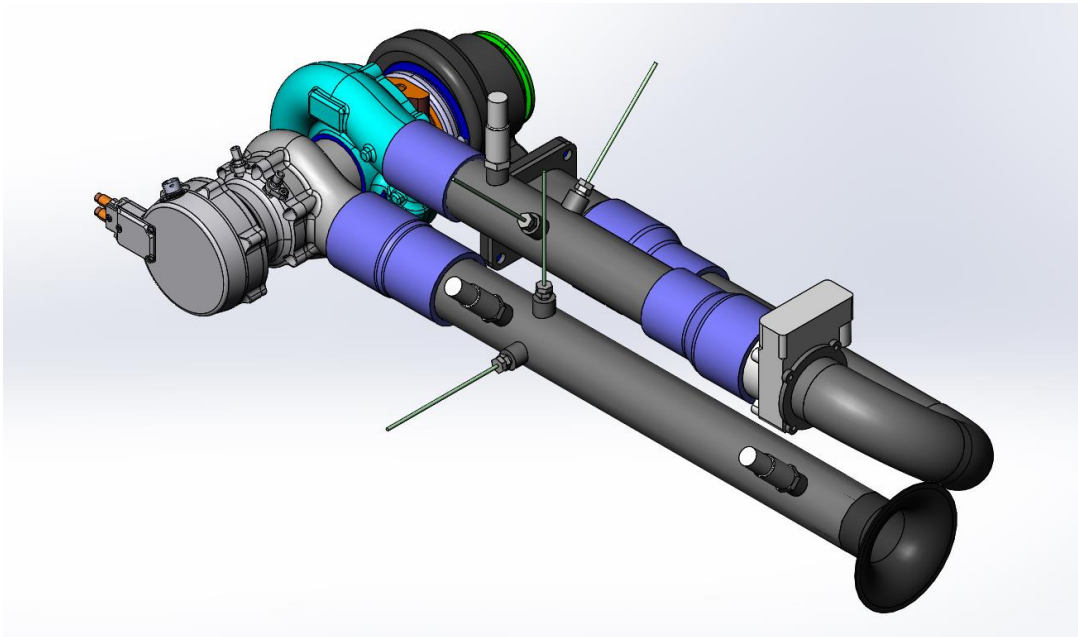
Isometric view of the test setup design with the EM65 electric motor
